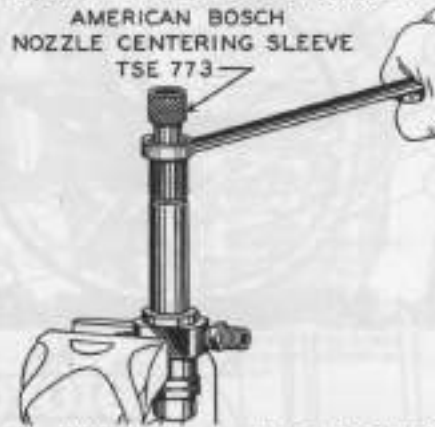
Using Bosch tool No. TSE773 to center nozzle tip in the cap nut.
